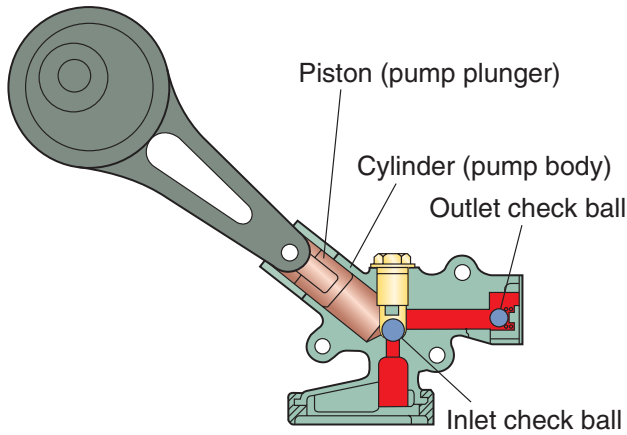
A plunger-type oil pump. It should be noted that not all plunger oil pumps use check valves, as shown in this illustration.
